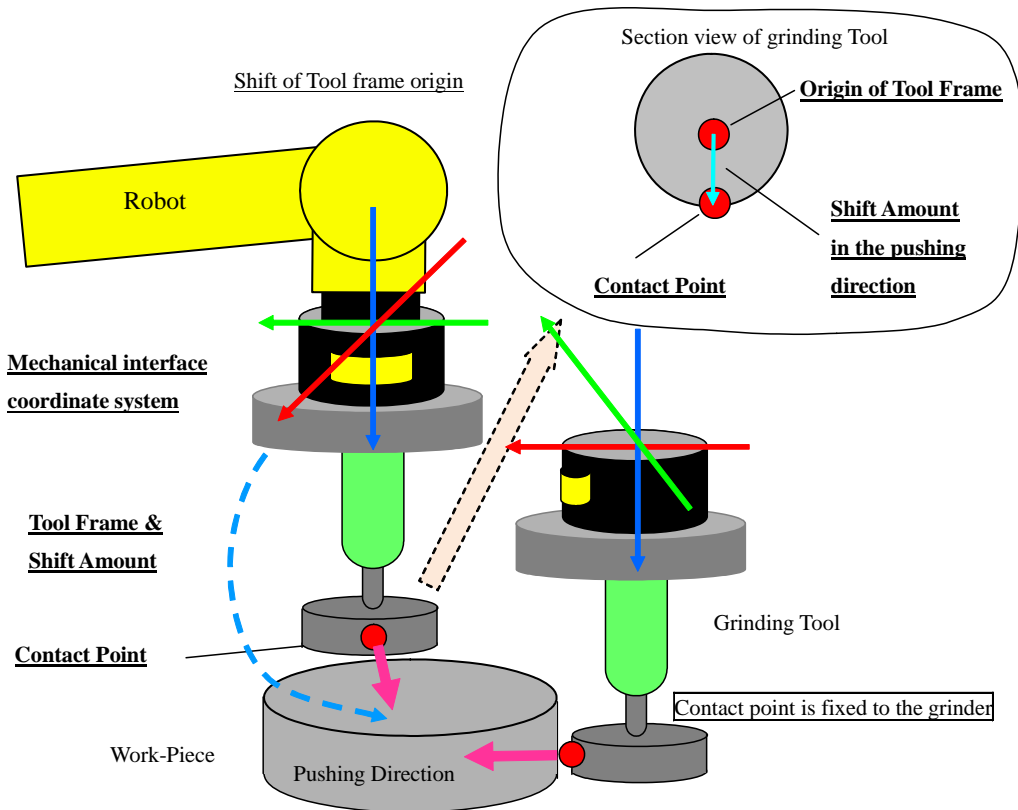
(f) Example 2 of setting TOOL to "3-Axis FS ContactP. Position"
